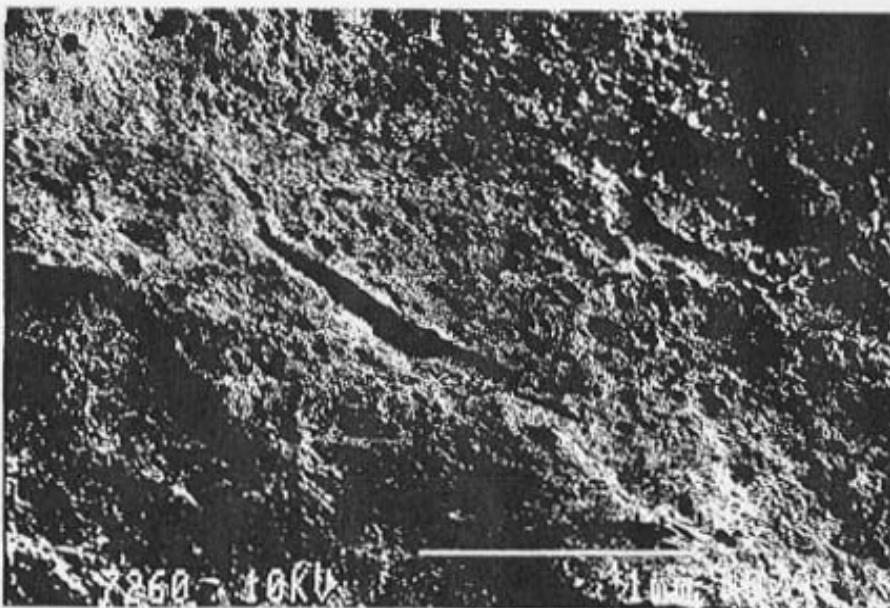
A 2 weld crack at hinge plate overview
